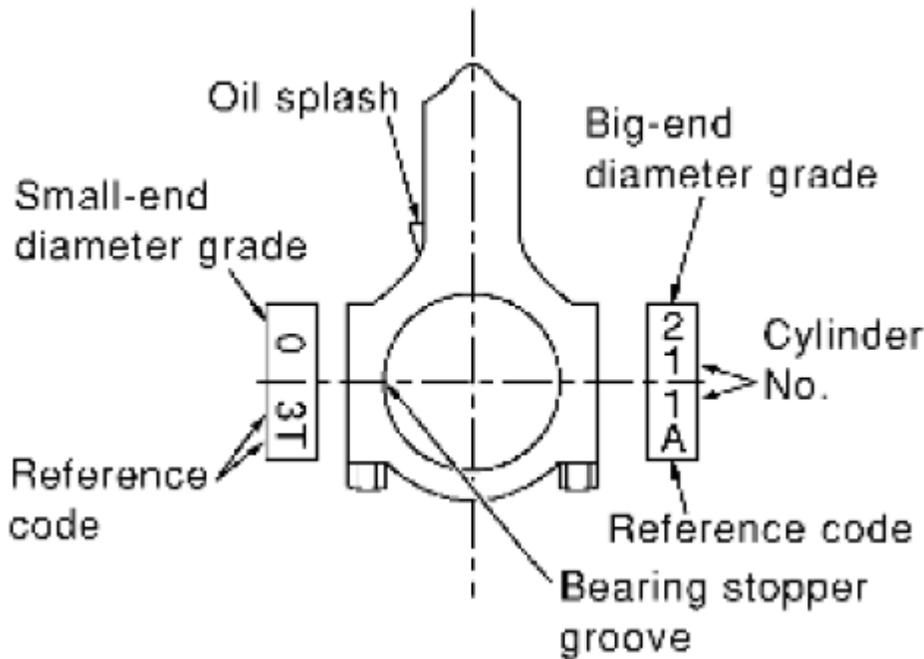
Position Of Installing Connecting Rod Bearing Caps
